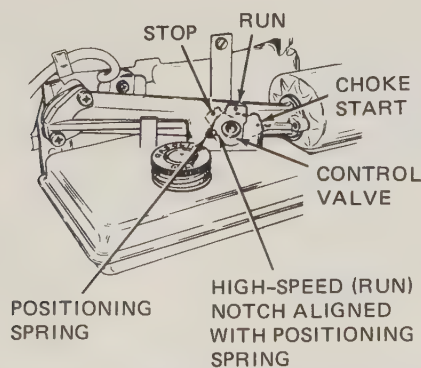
Exterior view of a suction-feed carburetor with a single control for starting, running, and stopping.
